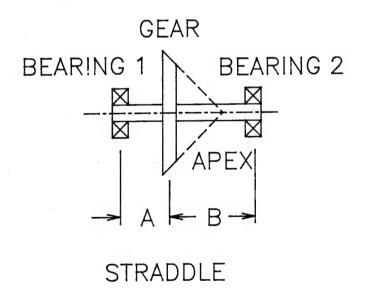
SPIRAL BEVEL SHAFT SUPPORT MOUNTINGS
